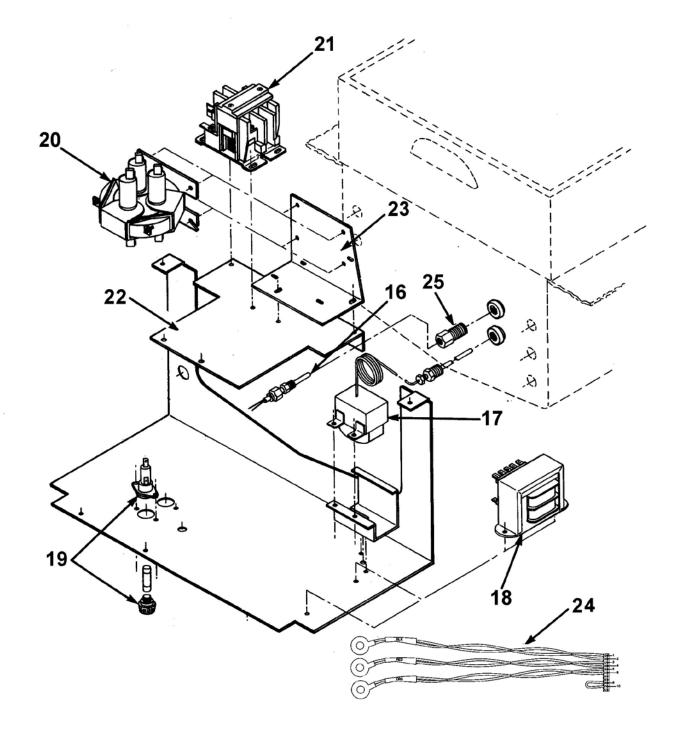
Computron 8000-500 – 3 phase Exploded View
